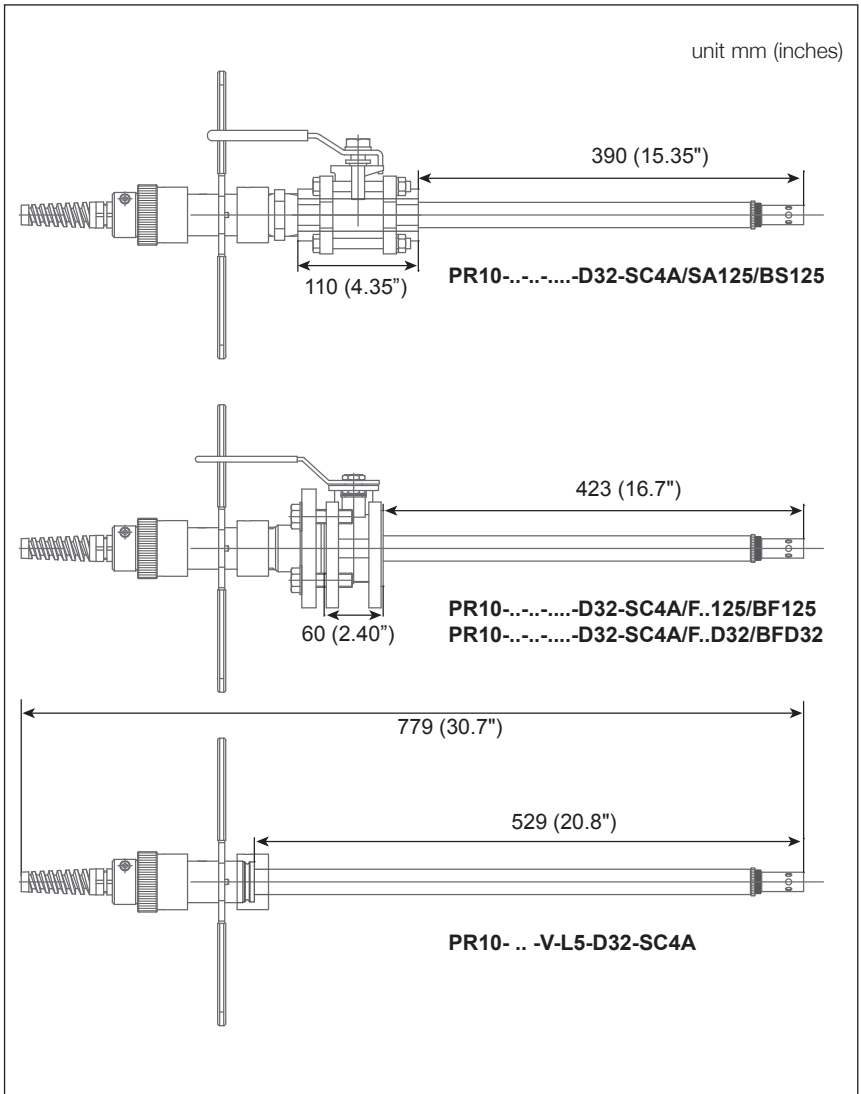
Dimensional drawing PR10...-D32 with mounted SC4A sensor
